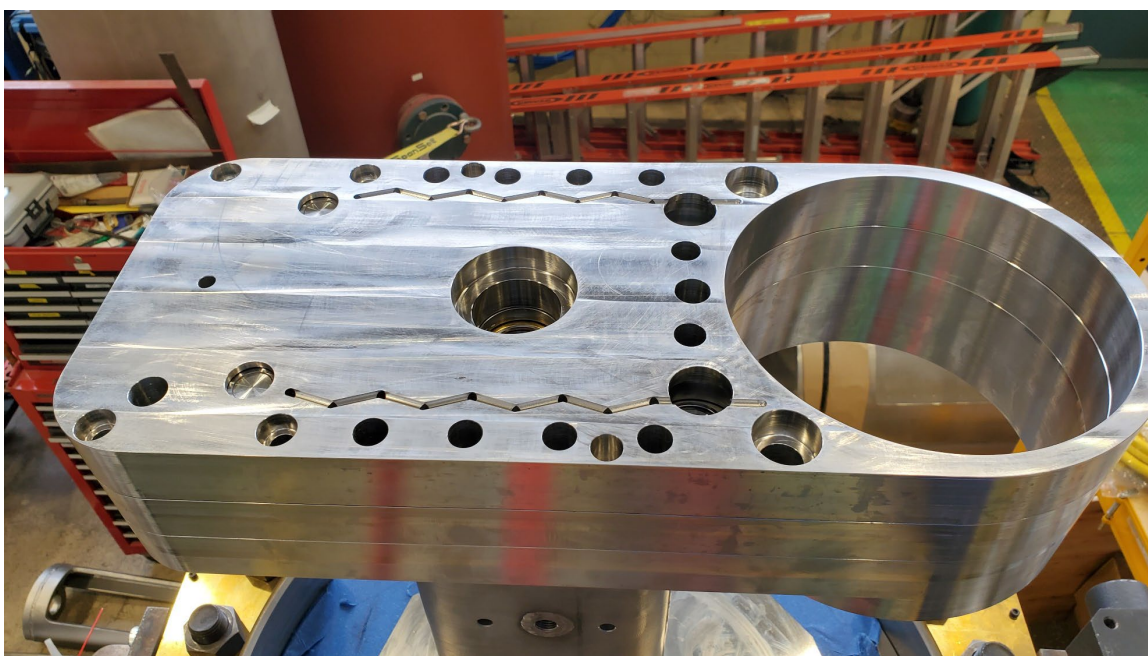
Fully assembled sodium gearbox on the original welded support column.
